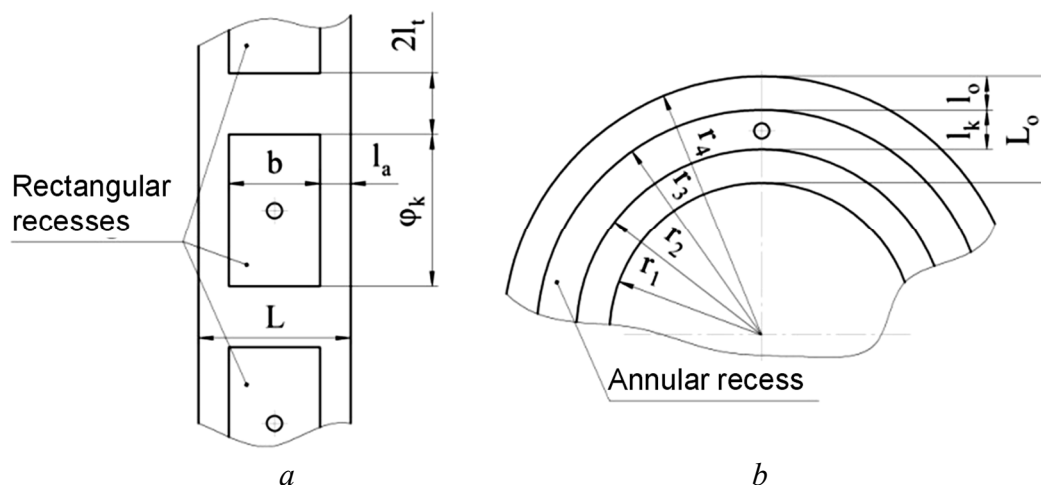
Geometry of a) journal bearing recesses and b) annular thrust bearing recess
